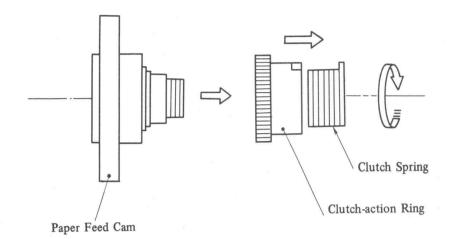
Paper Feed Cam Drive Disassembly (C)
